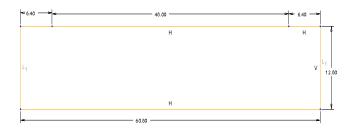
ASTM - D790 Flexural Test Specimen Details. [10]
